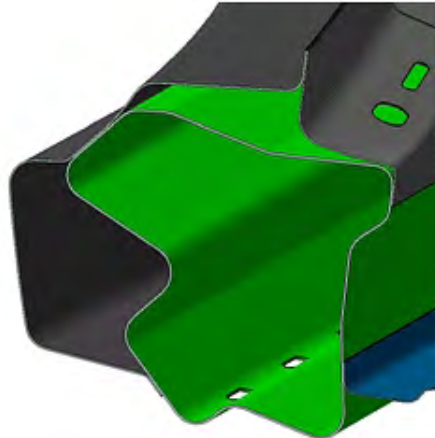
Rocker integrated to the body side inner and body side outer
